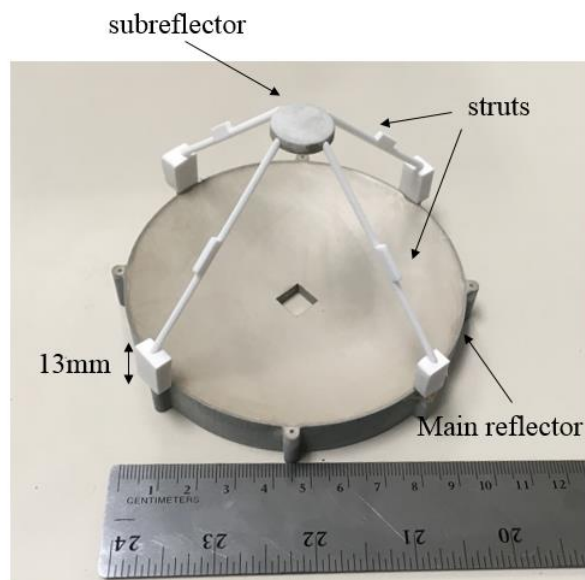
The silver coated and assembled reflector (without feedhorn).
